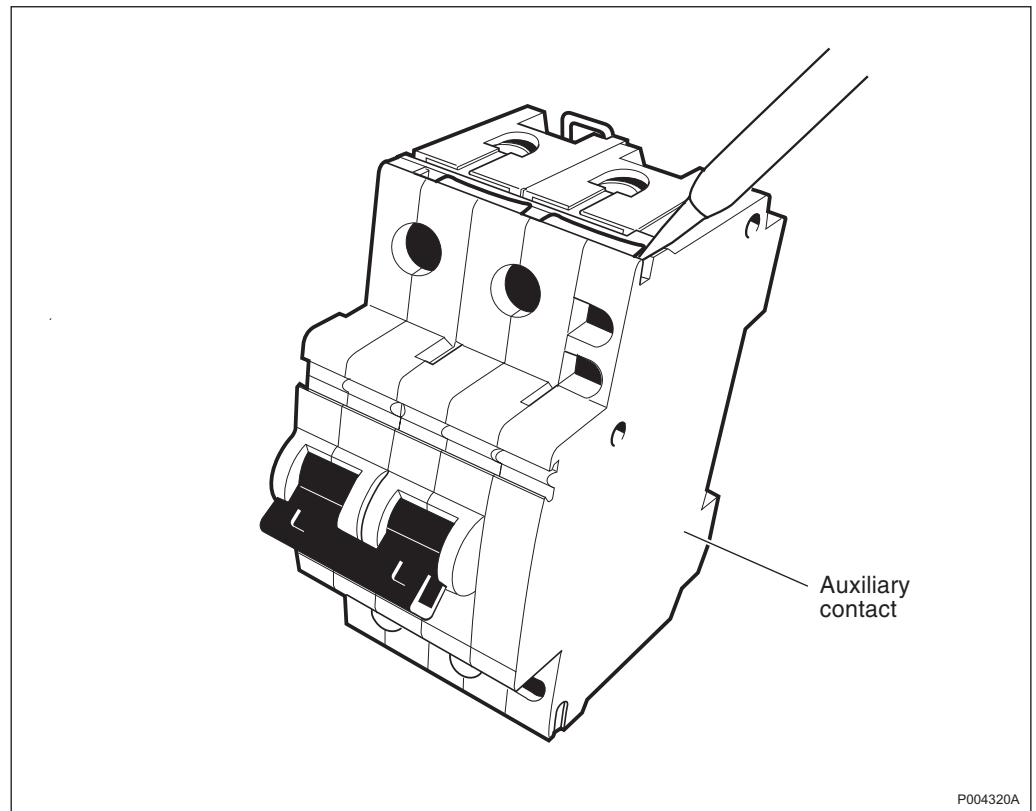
Removing the auxiliary contact from the service outlet circuit breaker
